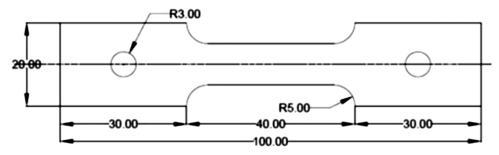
Geometry of Fatigue test specimen as per ASTM.
